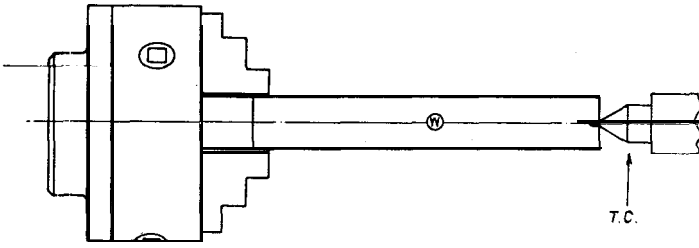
"Chuck and Centre" working. To obtain the best results, first lock tailstock centre in approx. position, place oiled centre hole of work W on to T.C. Pass other end of W between chuck jaws and, pushing W towards T.C., tighten chuck jaws
